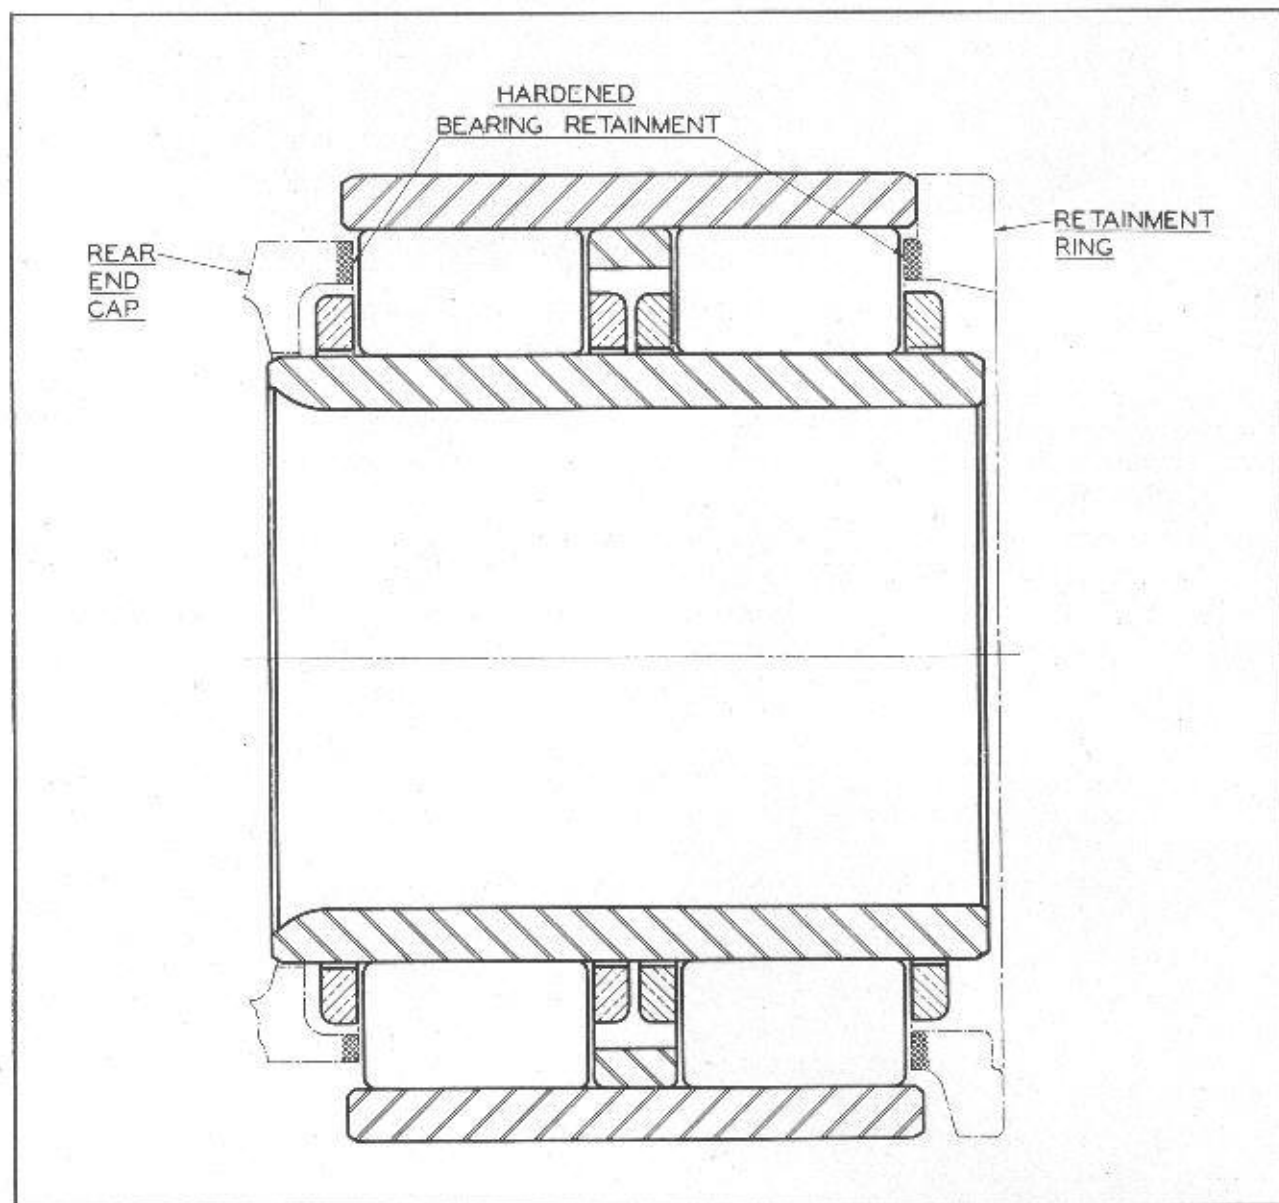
Front and rear roller retainment showing hardened surfaces adjacent to roller ends.
